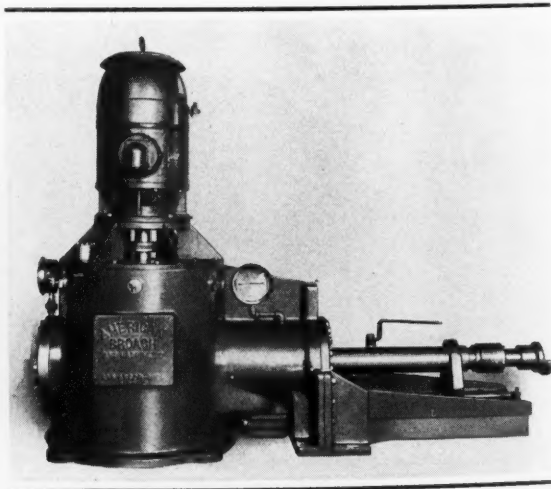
Broaching and Pressing Machine Built for Use in Joining Huge Tubes at Boulder Dam
